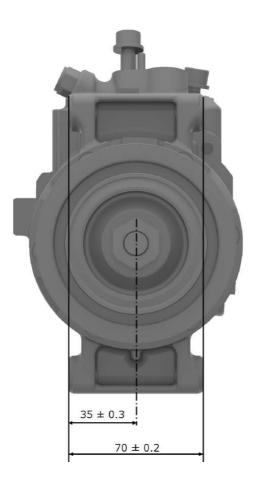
Dimensions of air conditioning compressor Denso 6SU14 (front view)
